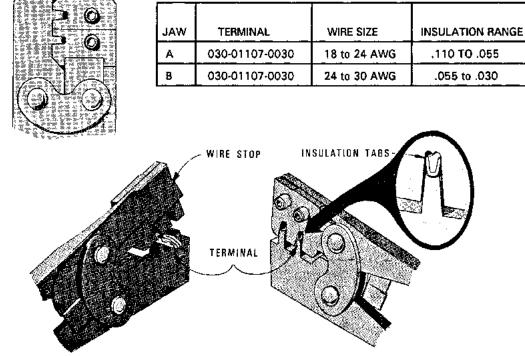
CRIMPING TOOLS (MOLEX) (Sheet 1 of 3)
